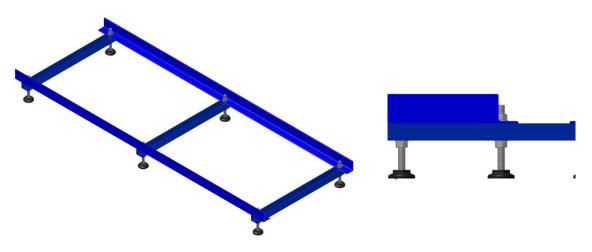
Constructing the base by connecting the three channel sections to the angle sections
